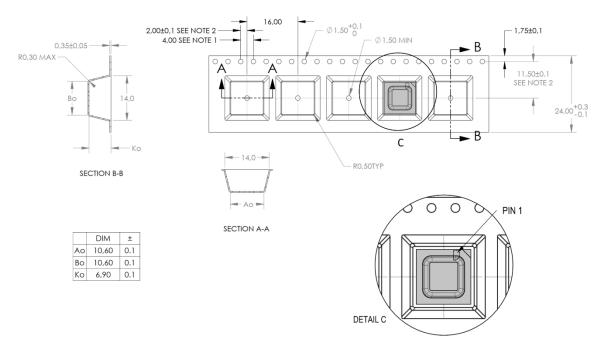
Technical drawing of the packaging tape with sensor orientation in tape. Header tape is to the right and trailer tape to the left on this drawing. Dimensions are given in millimeters.
